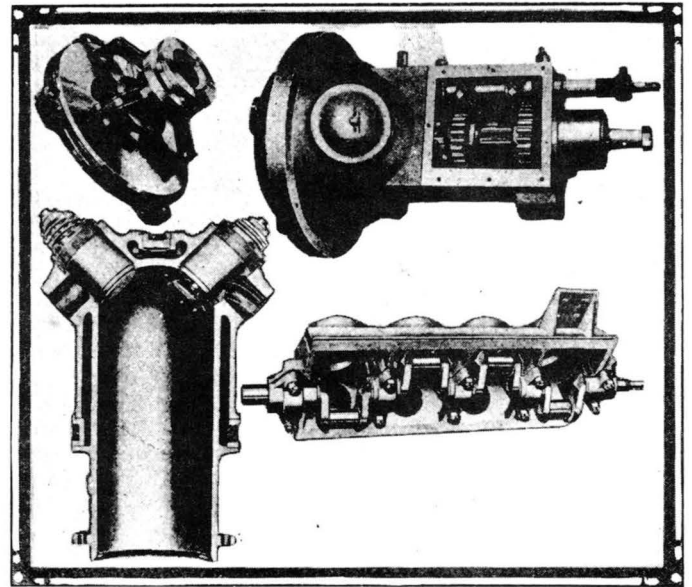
Sectional view of cylinder, showing spherical head and 45-degree angle valve; crankshaft; transmission; clutch.
